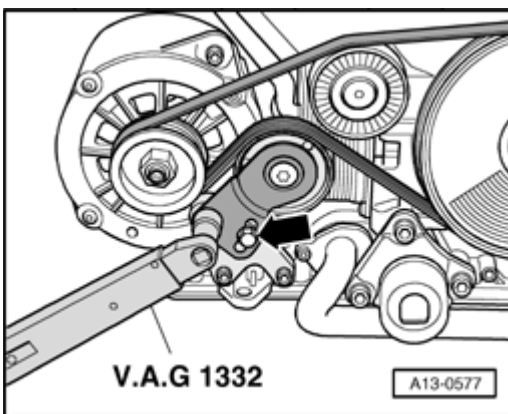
Positioning Torque Wrench On Belt Tensioner Hex Bolt
